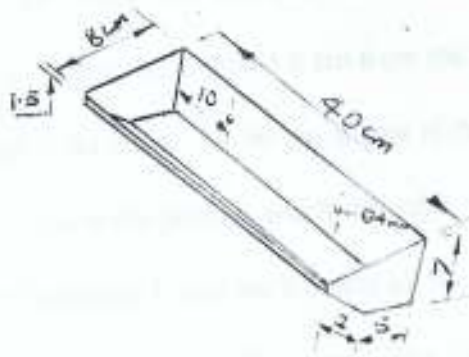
Schematic Diagram of Slanting Conveyor Cup.
